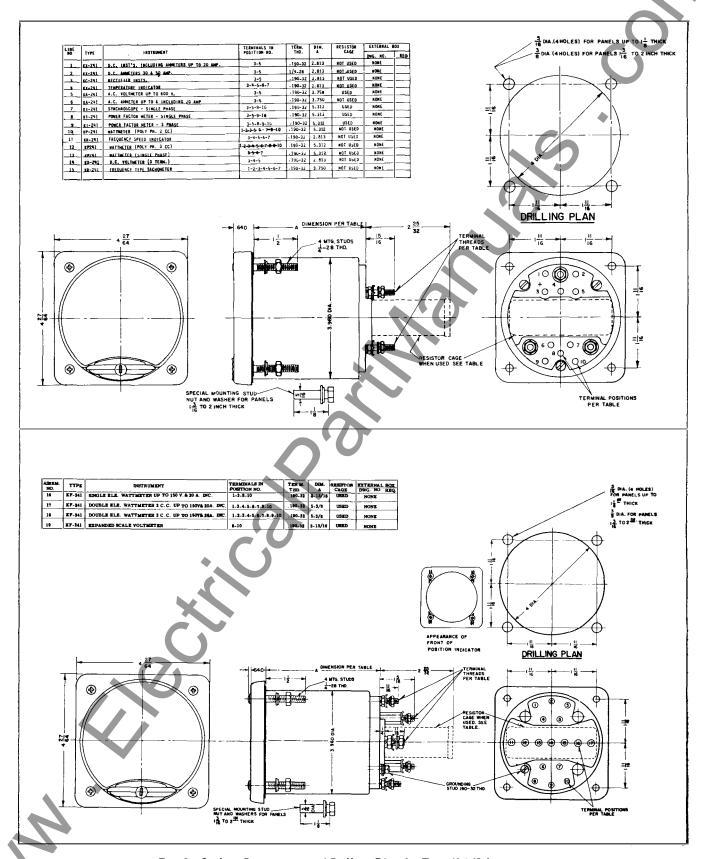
Outline Dimensions and Drilling Plan for Type K-241 Instruments.
